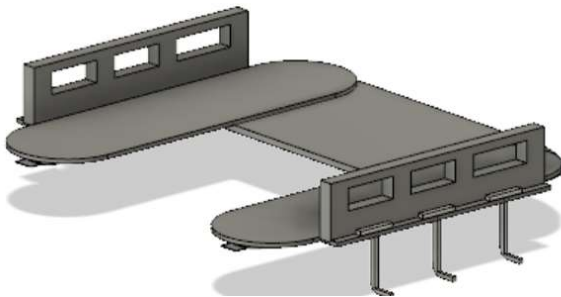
Assembled Final Armboard Design. Fully assembled armboard with removable hooks.
